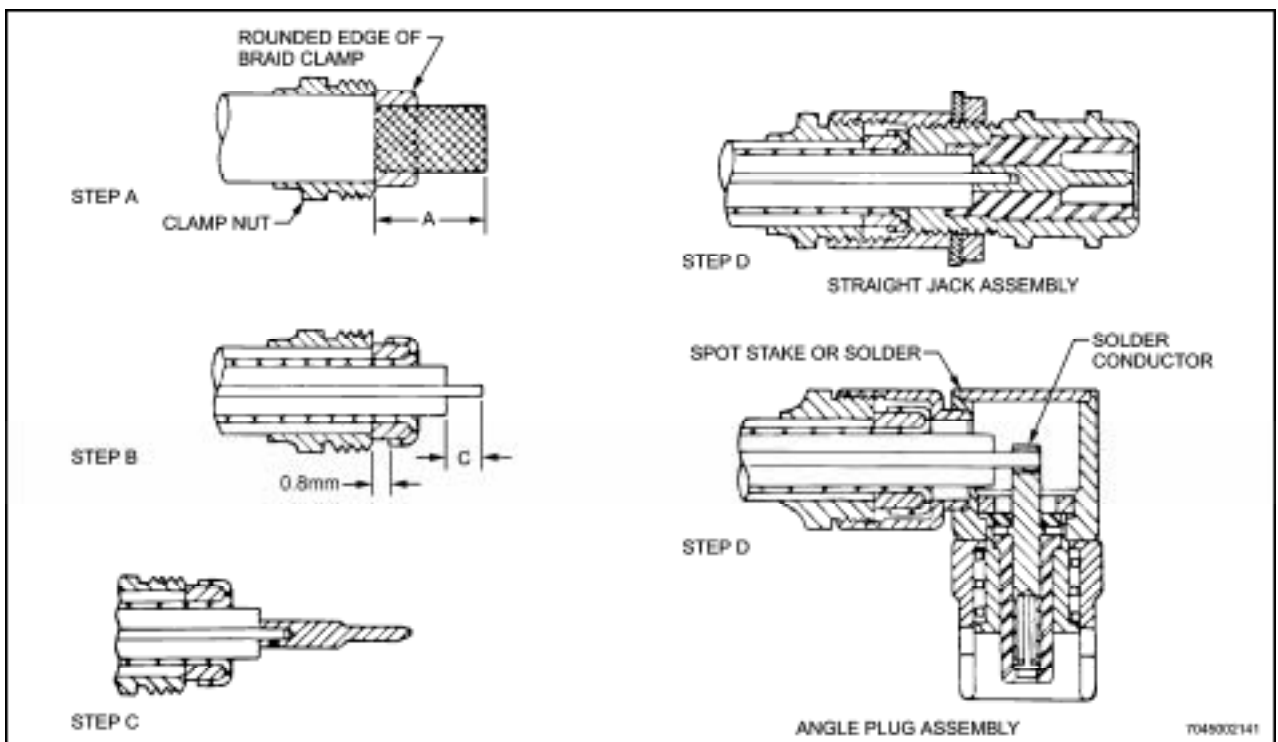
Attaching MB Connectors to Coaxial Cable
